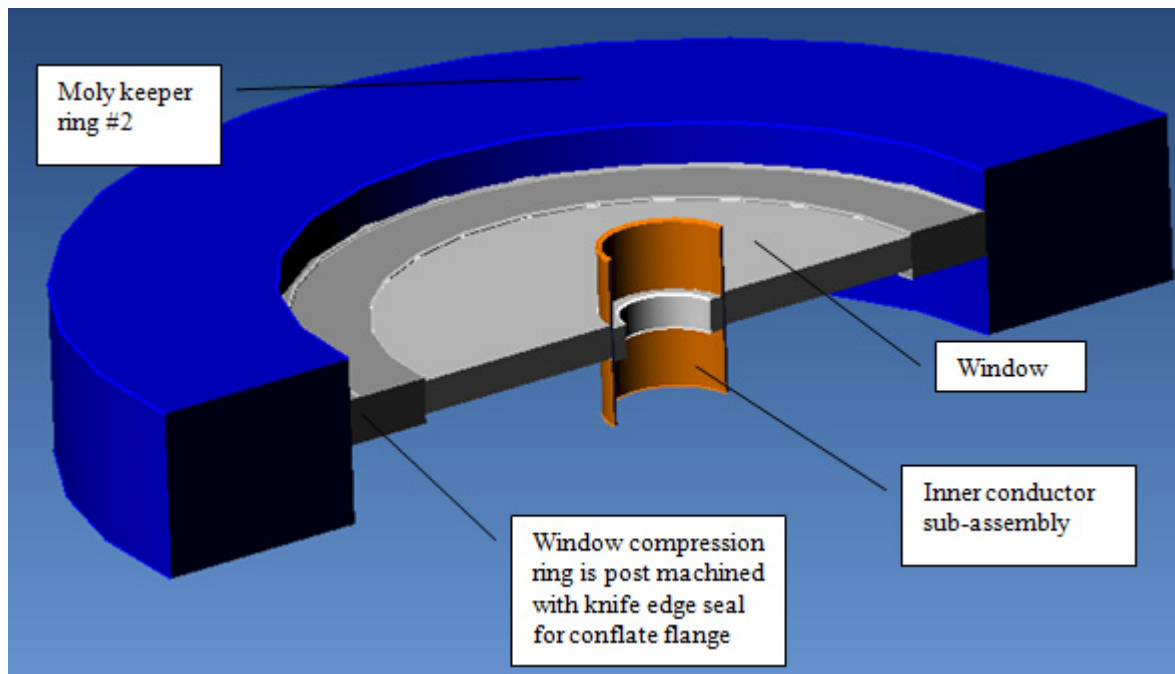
The final assembly of the window braze with the Moly keeper ring which will be removed after brazing.
